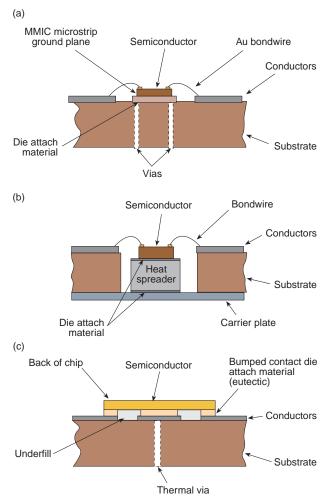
(a) Conventional surface mounting, (b) cavity mounting, and (c) flip-chip mounting techniques for MMICs.
